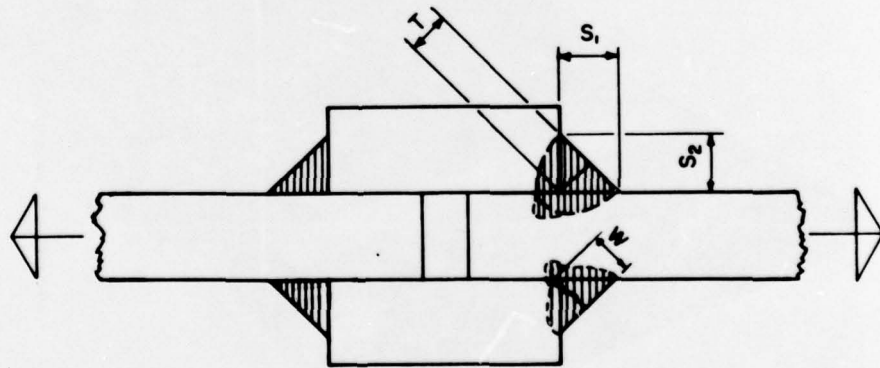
Dimensions used in calculating shear stress values in fillet weld test specimens.
